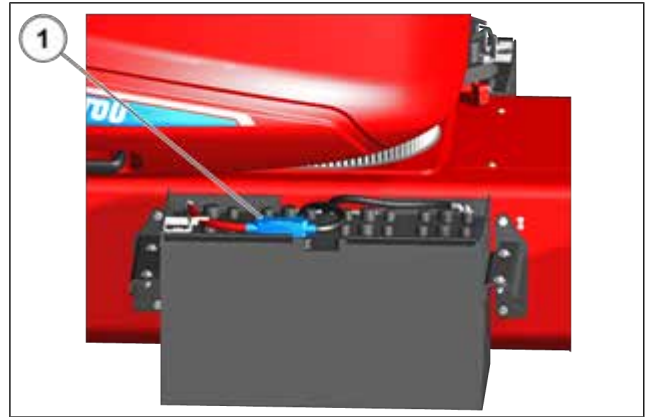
Putting the high-voltage electrical circuit fuse back in place - up to machine no. MAN00000J01101633
